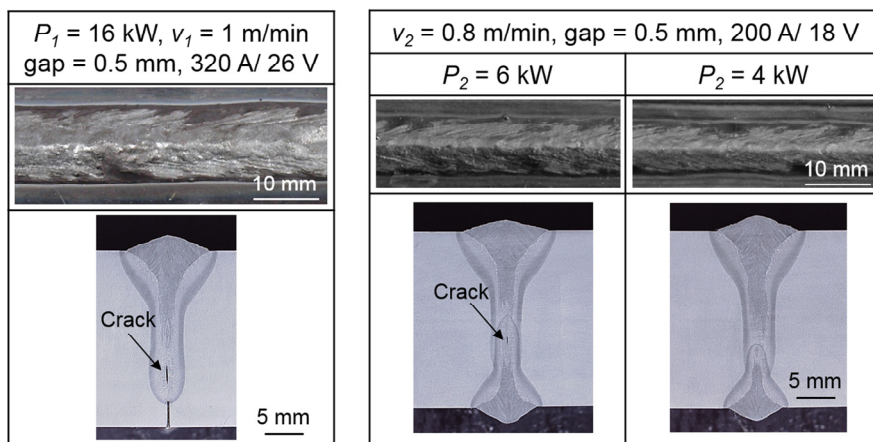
Surface appearances and cross sections of weld beads produced by two-sided laser-CO₂ arc hybrid welding.
